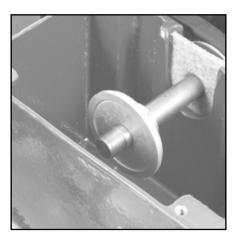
Four flat-head machine screws Fig 2 - Inner flange on shaft secure the saw table to the reservoir tank
